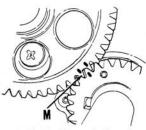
Align timing marks (M) as shown when reinstalling timing gears.
